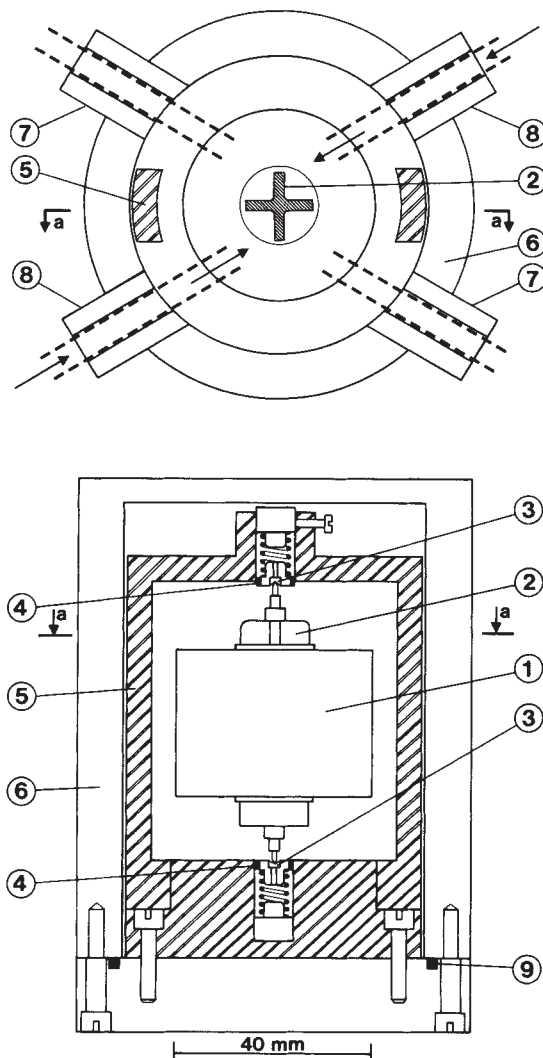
The spinning rotor assembly: 1, brass rotor; 2, turbine blades; 3, spring-loaded jewel bearings; 4, rubber bushing; 5, aluminium-alloy support for bearings; 6, perspex case; 7, guides for gas-drive injector tubes (clockwise rotation); 8, guides for gas-drive injector tubes (anticlockwise rotation); 9, "O" ring.
